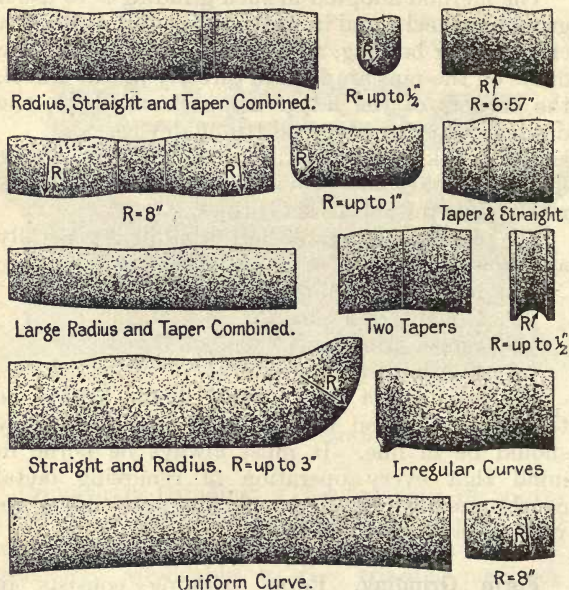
TYPICAL WHEEL FACES FOR FORM GRINDING
